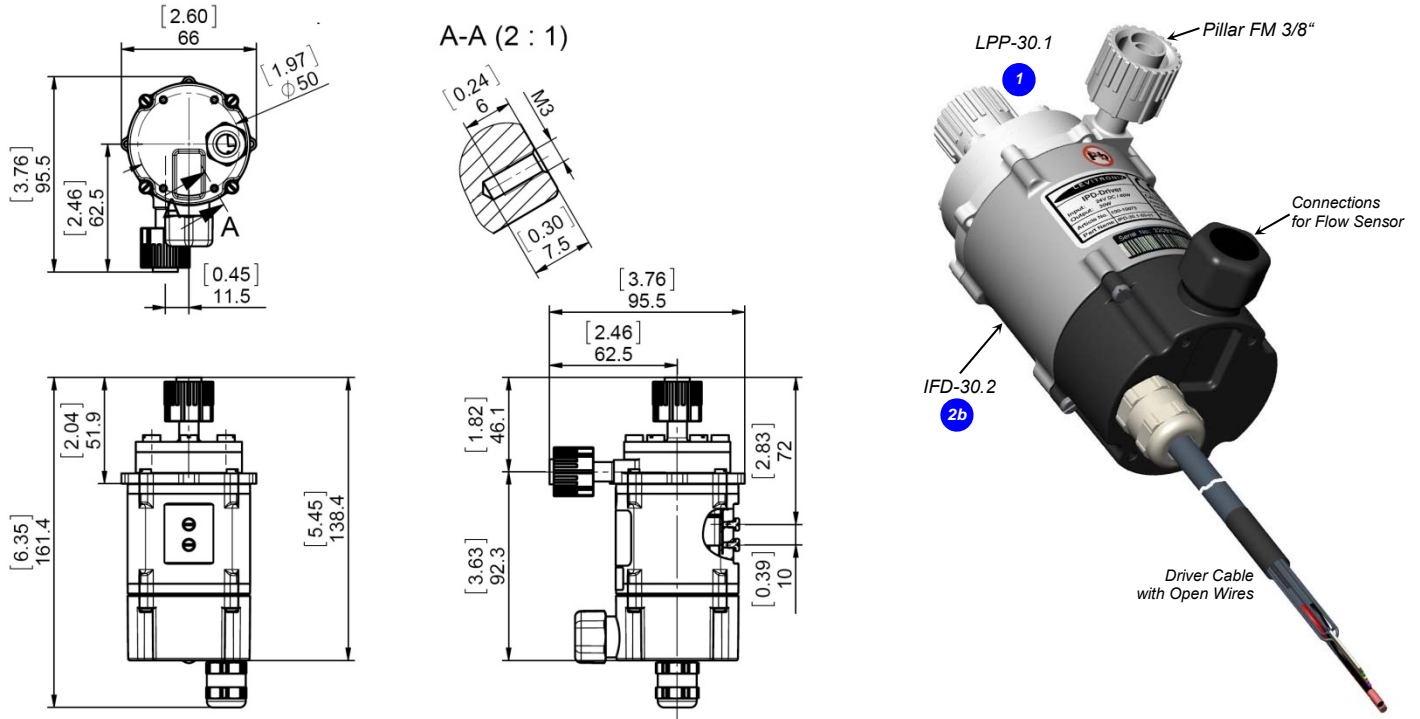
Dimensions of integrated flow control driver with pump head (in mm and [inch])
